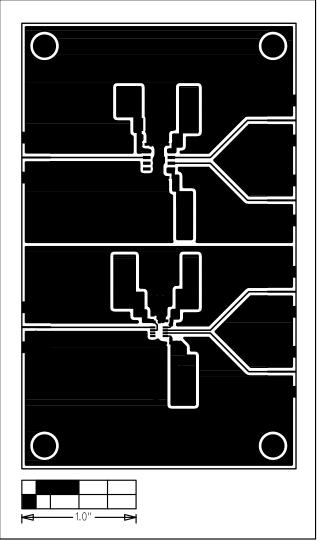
MAX9360 EV Kit PC Board Layout—Component Side
